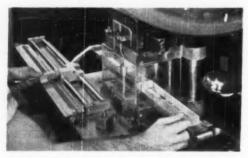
CHANNEL-TYPE MOUNTING PLATE IN POSITION TO BE PUNCHED
